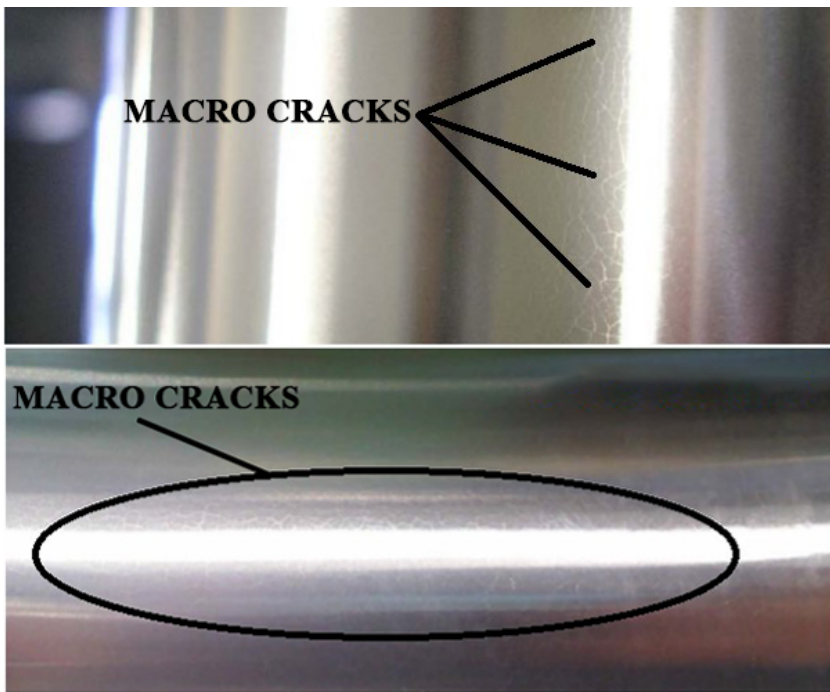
B737 – 800 Main landing gear inner cylinder macro cracks
